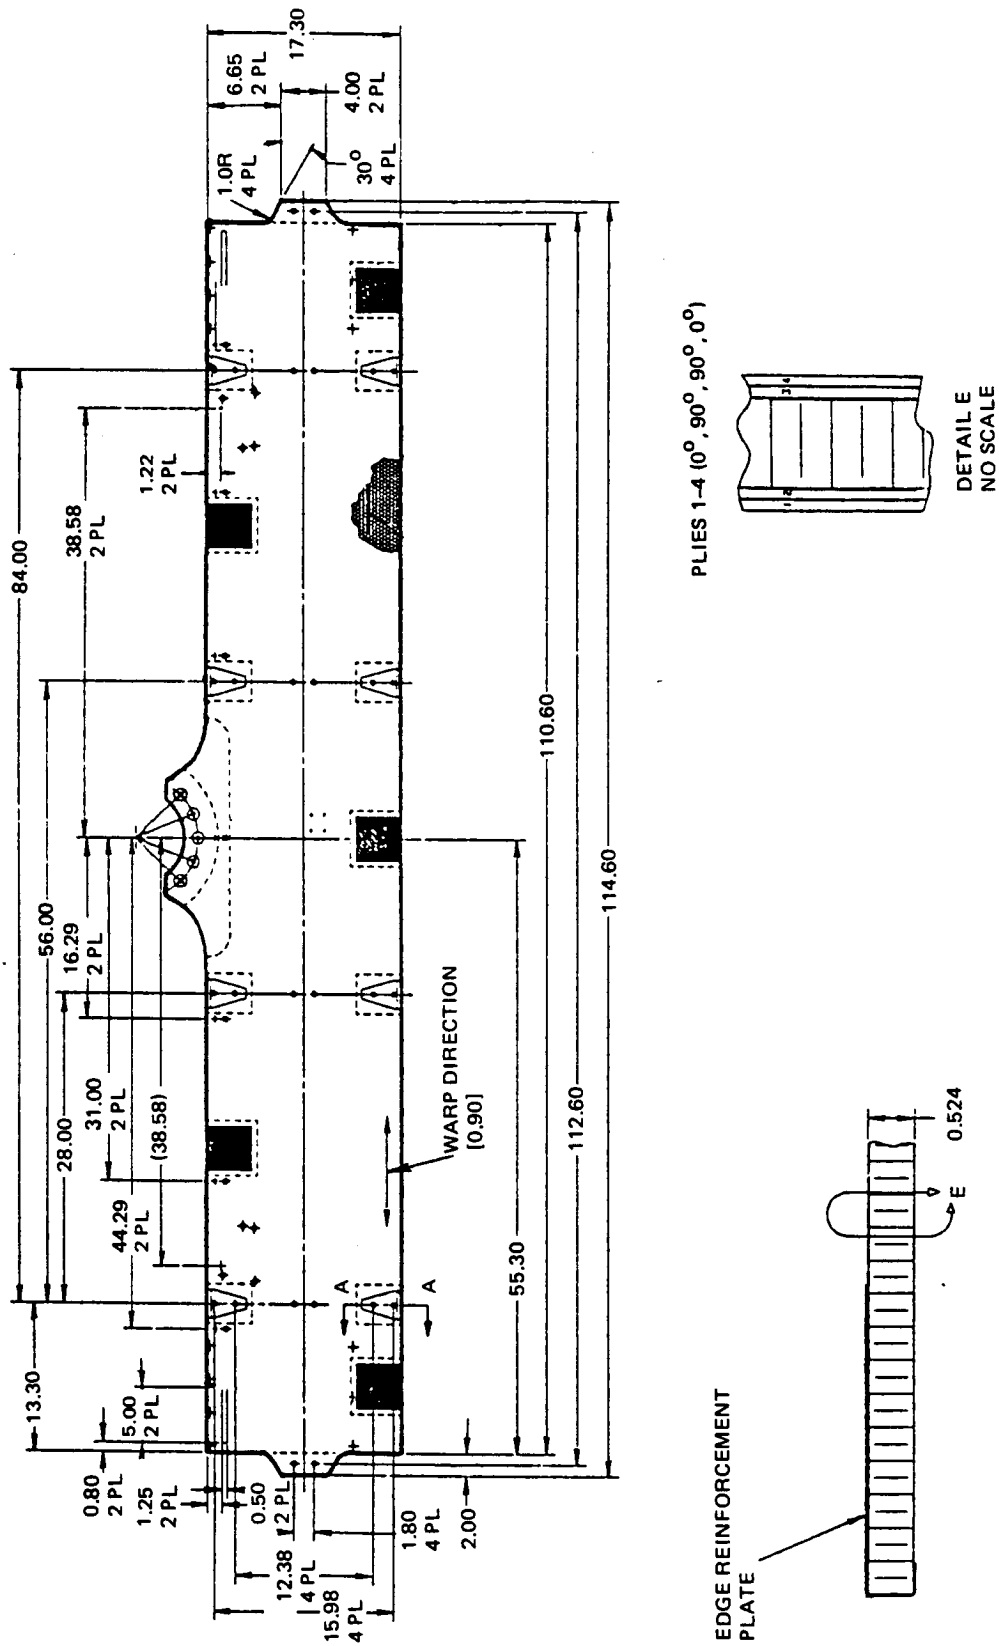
Blanket Housing Pallet Panel Assembly Structure
